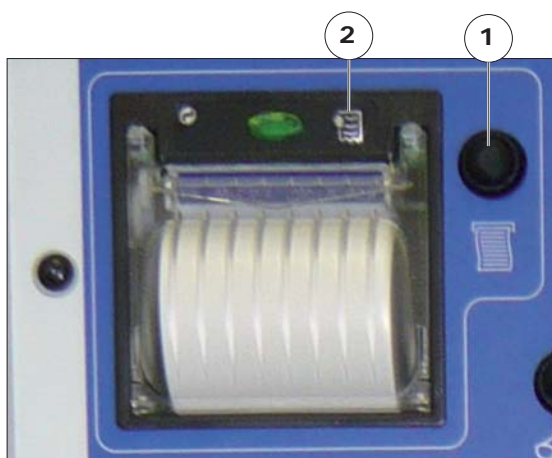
Reprint ticket for weld carried out
